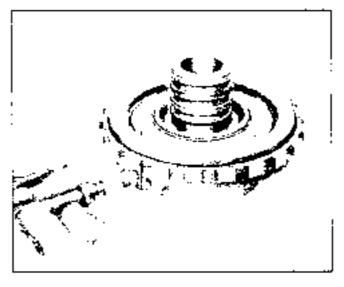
Air Checking Intermediate Clutch Fisters
